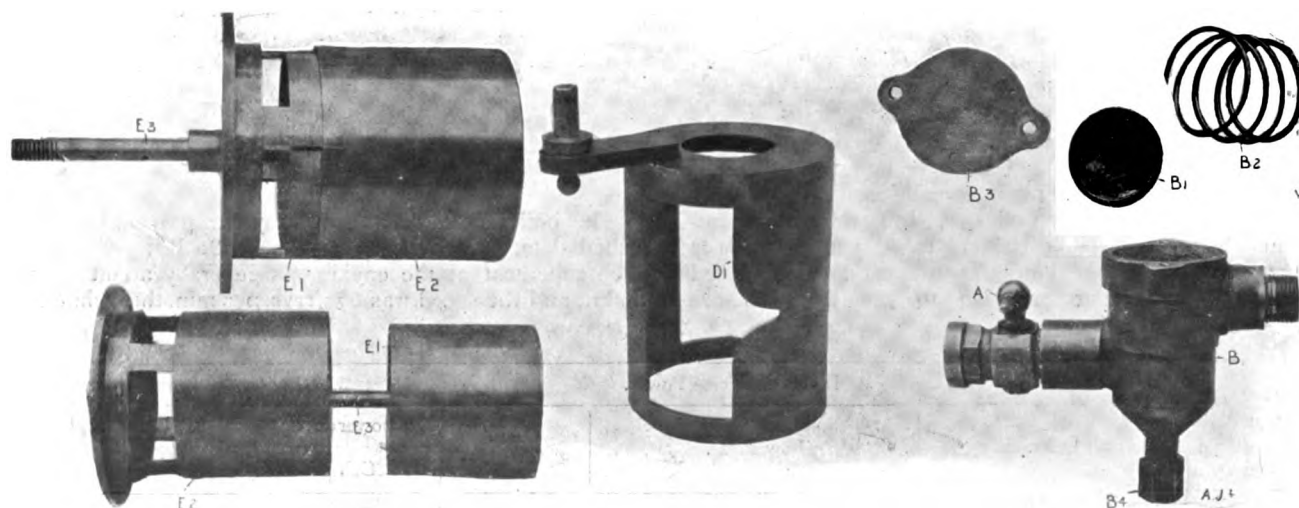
The Napier Carburettor. Two views of the governor-controlled throttle-valve, together with views of the hand-controlled throttle-valve, and the fuel-filter.
